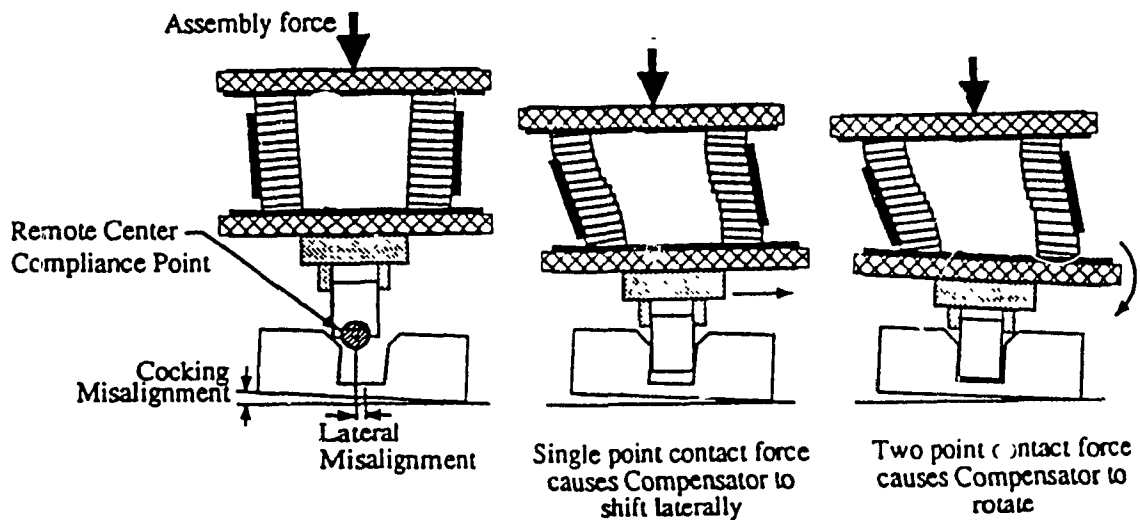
Contact forces while assembly [ATI Inc.]
